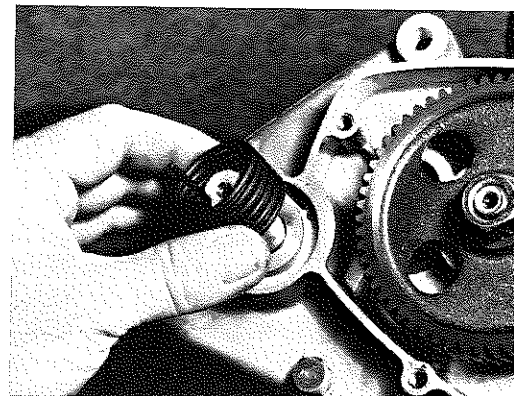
Installing kick spring. Short prong of spring fits into crankcase.
